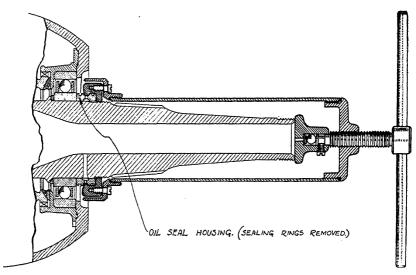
WITHDRAWING OIL SEAL HOUSING FROM AIRSCREW SHAFT.
